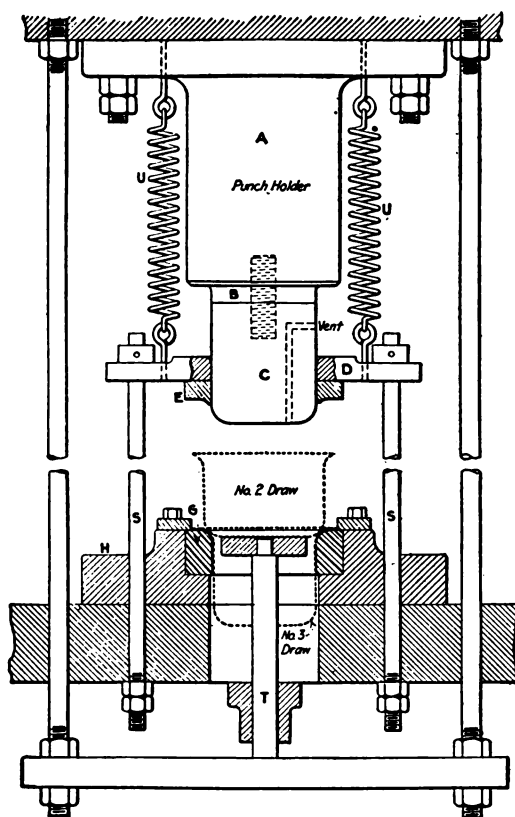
Arrangement of the dies for drawing shells shown in Fig. 238
